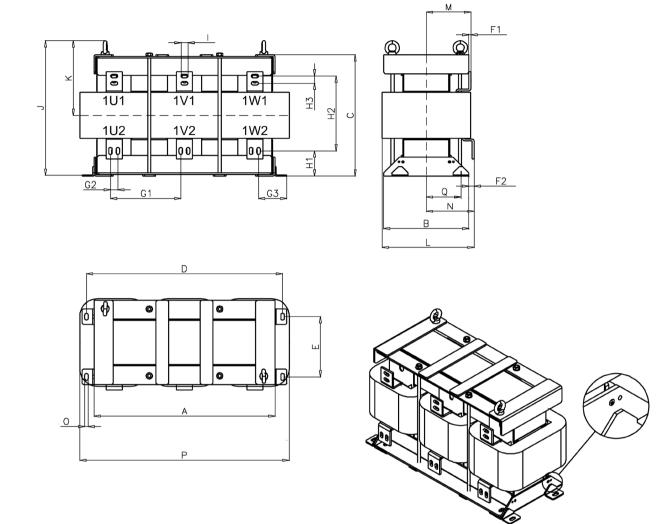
Dimension drawing of line reactor 6SL3000-0EH41-4AA0
